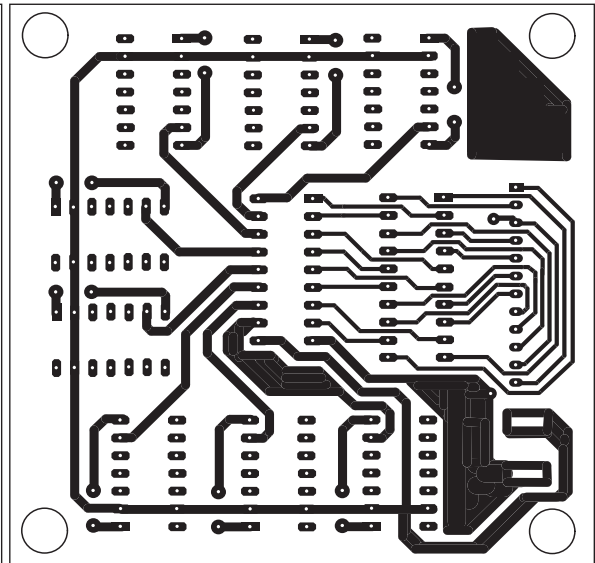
Actual-size, single-side PCB-2 layout for relay driver circuit
